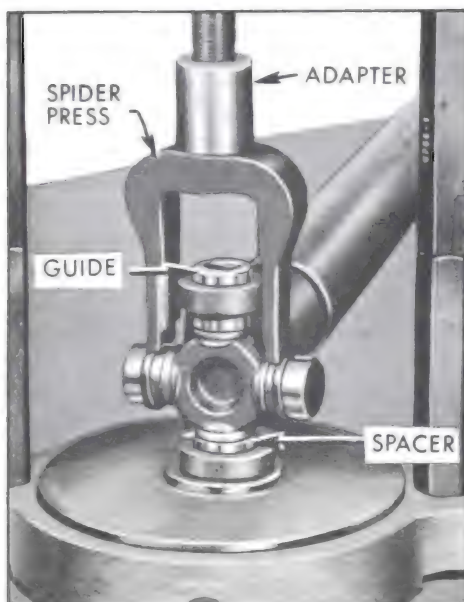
Removing Bearing with Guide and Spacer in Place
